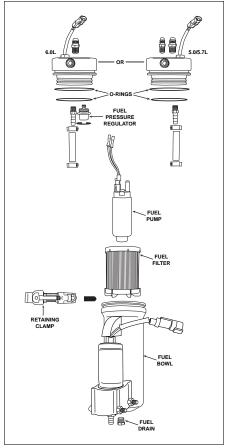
Fuel Control Cell (FCC) - Clamp-on Canister (Typical)
